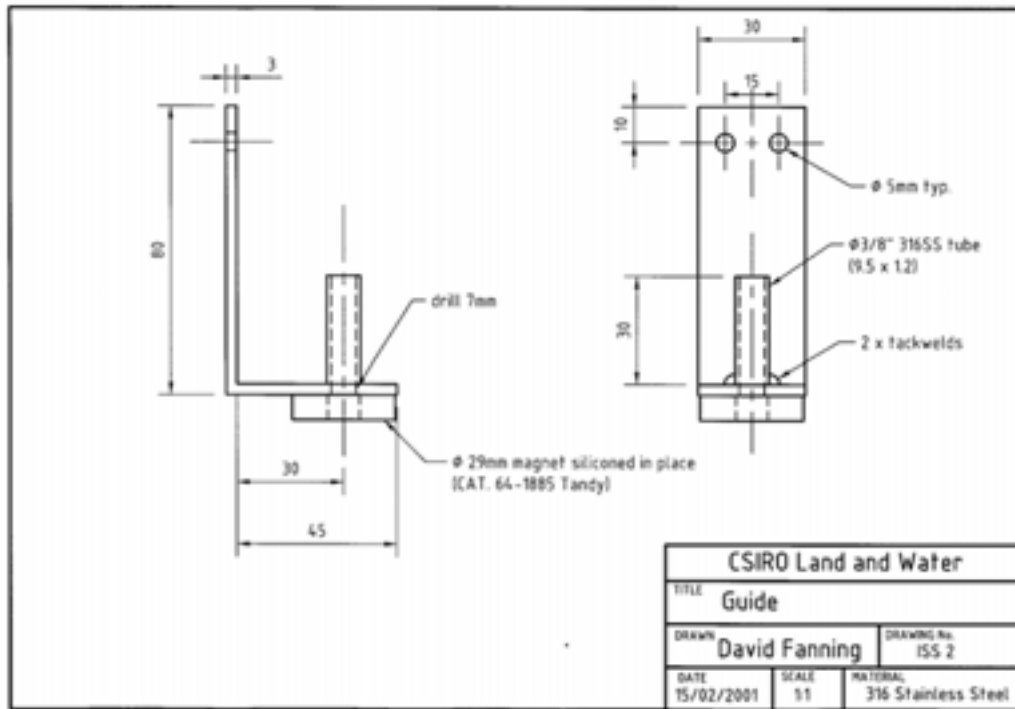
Drawing of guide component of bottle sampler (0.5 x scale)
